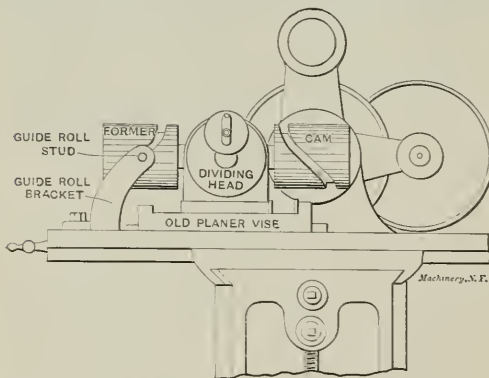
Cutting a Cylindrical Cam with the Rig shown in Fig. 2.
